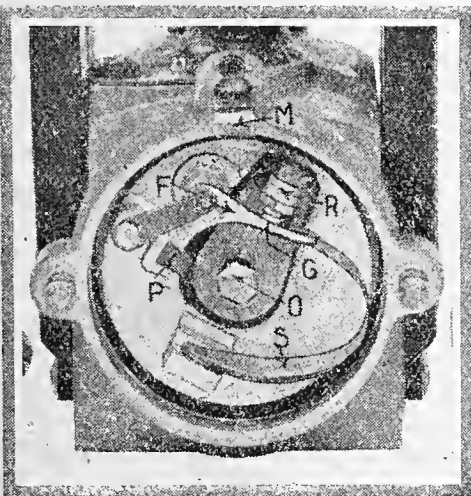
Showing the contact breaking mechanism. The cam L, operating the bell crank F, is shown in fig. 1.
